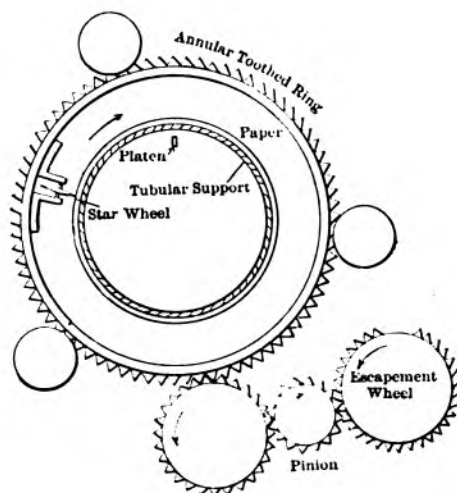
A.—END VIEW OF ANNULAR RING PAPER FEED GEARING.
